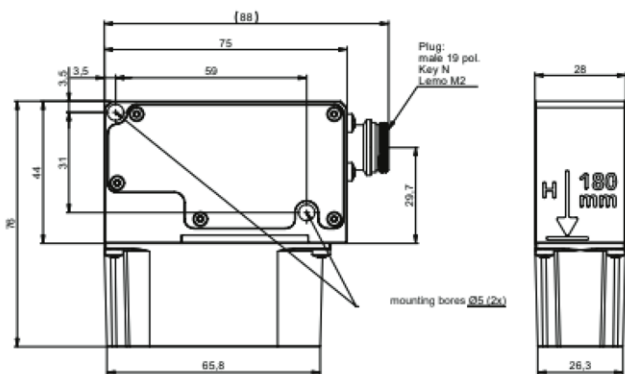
Correvit SFx-F1 sensor head dimensions 2067A1
